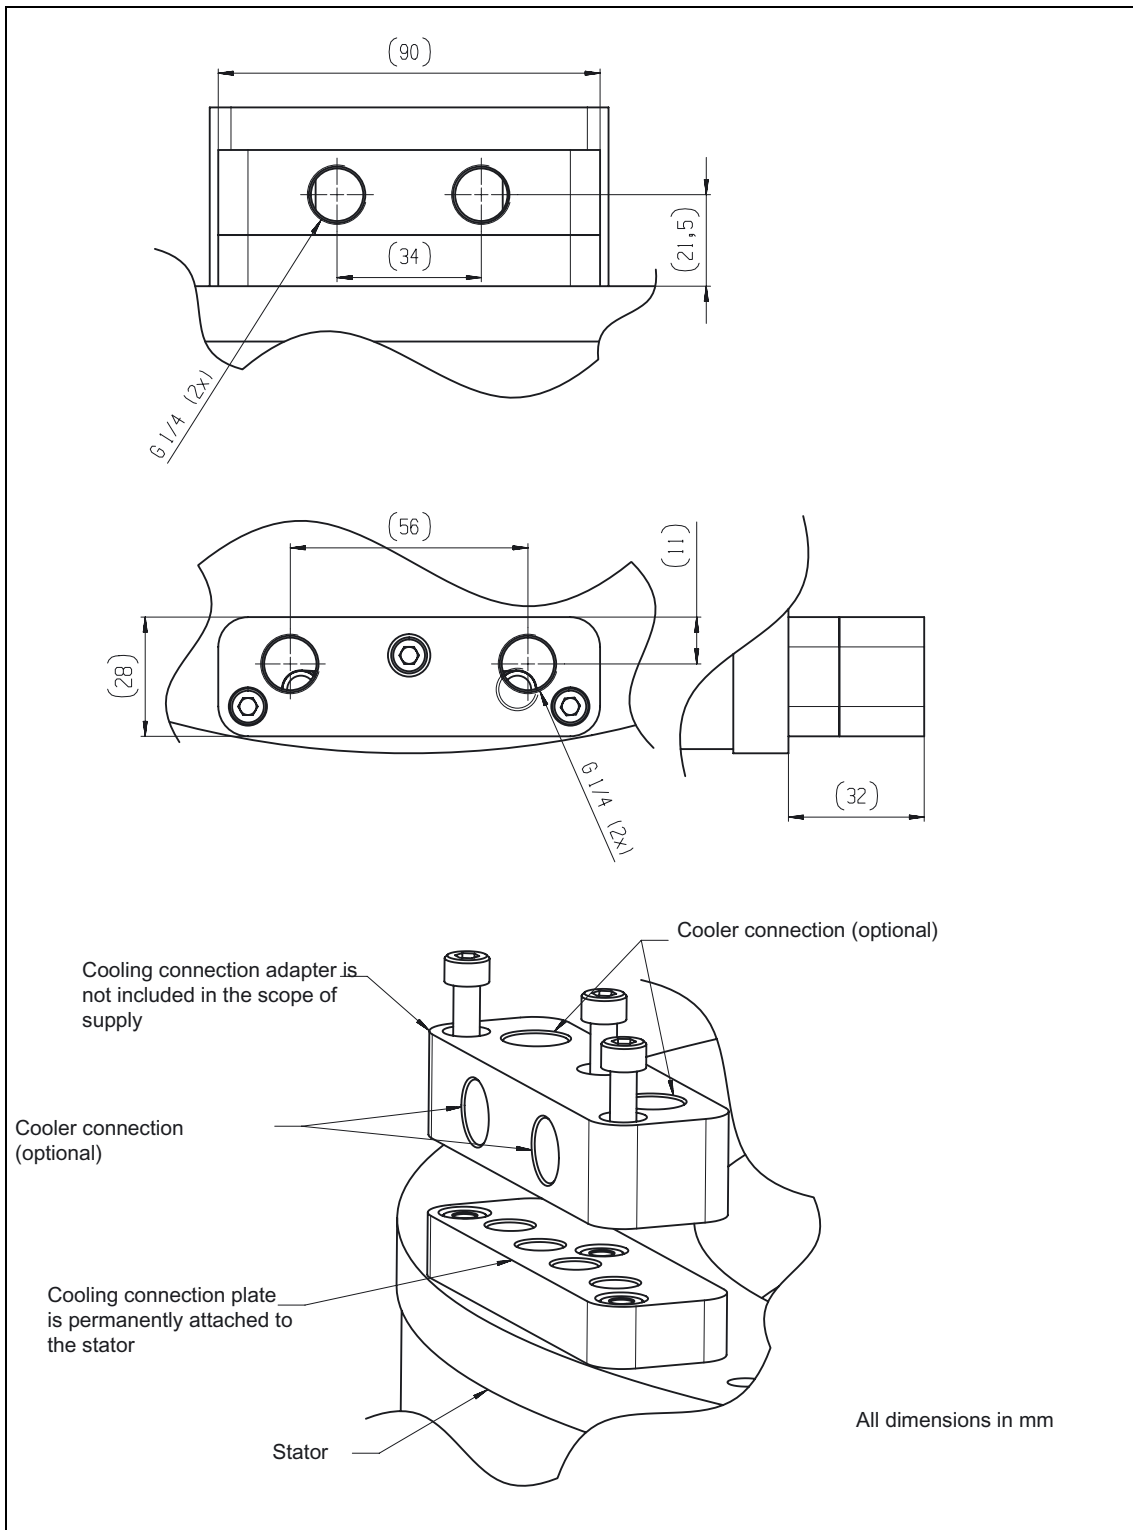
Mounting the cooling connection adapter 1FW6160, 1FW6190, 1FW6230
